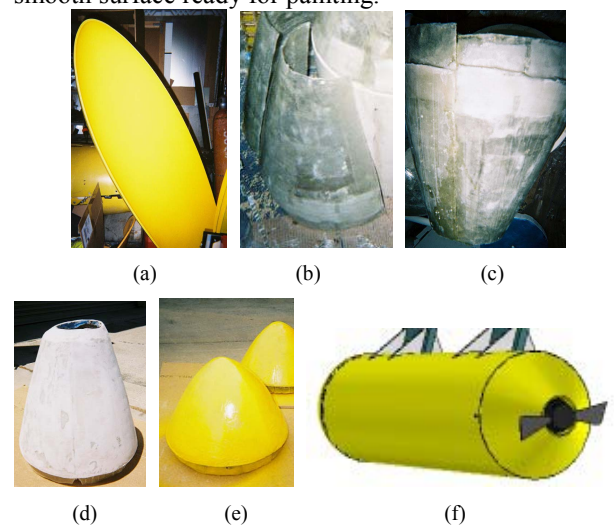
Process used to create end caps: (a) existing AUV shell used as a mold, (b) end caps were created in halves, (c) halves were joined, (d) end caps were sanded and filled, (e) end caps were painted, and (f) a CAD drawing of pontoons with thrusters mounted
